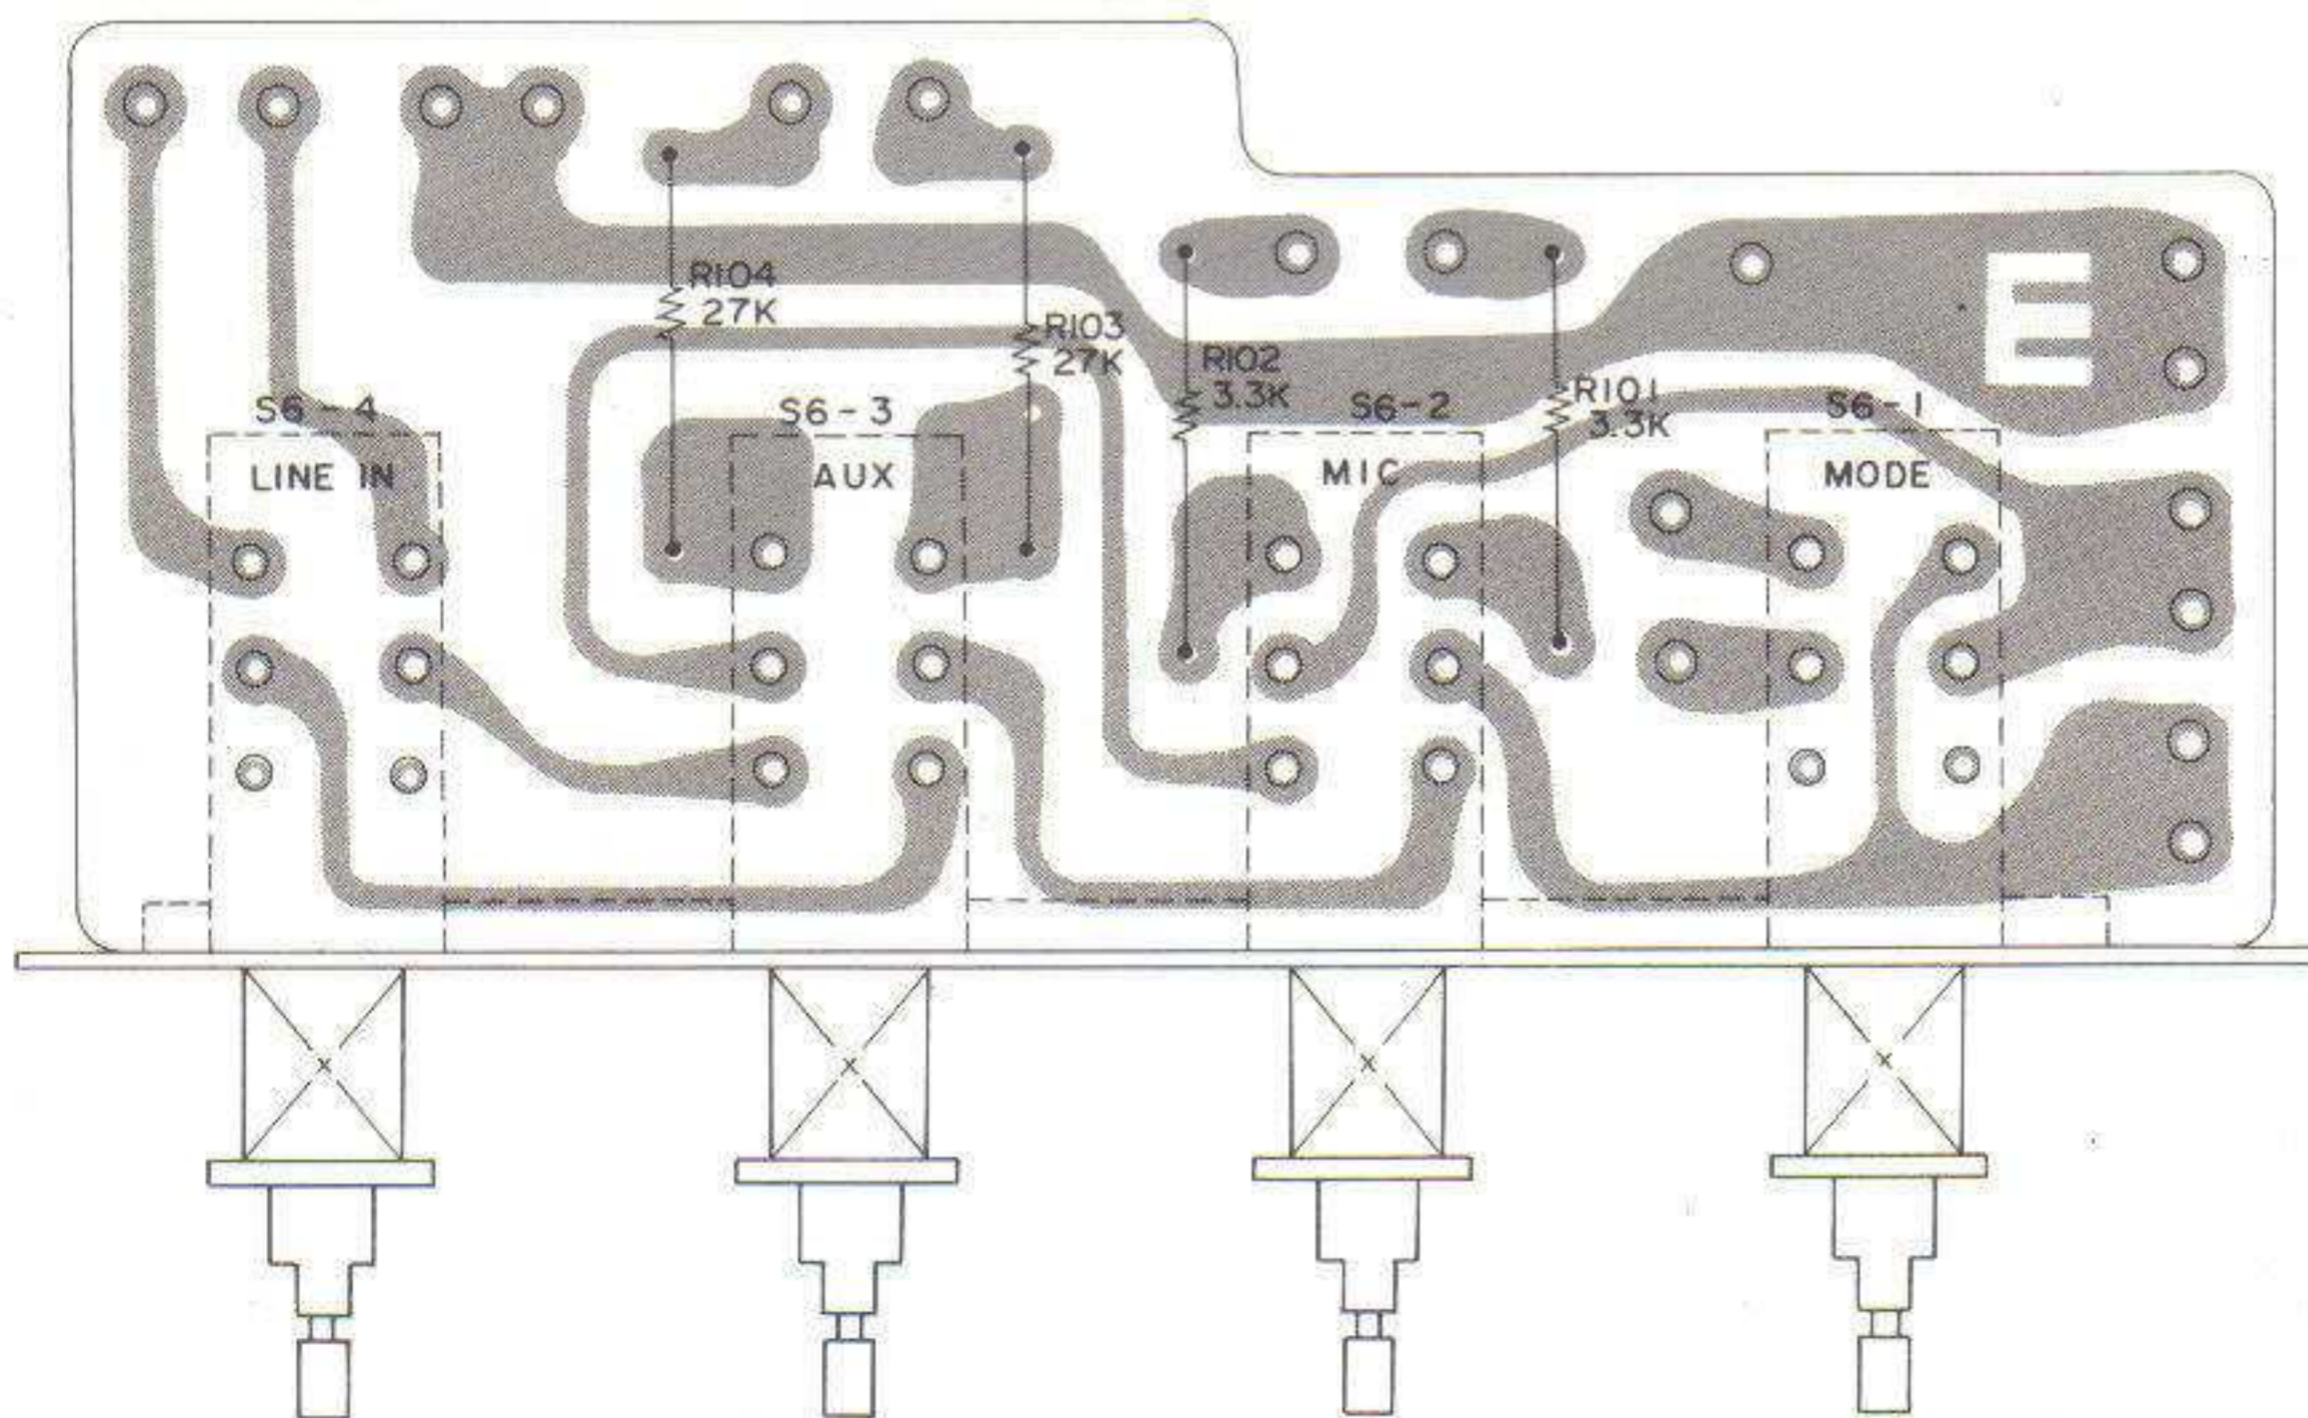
Bottom View of Push Switch P.C. Board (For TE)
